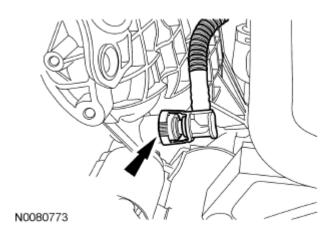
Identifying EGR Tube Courtesy of FORD MOTOR CO.
